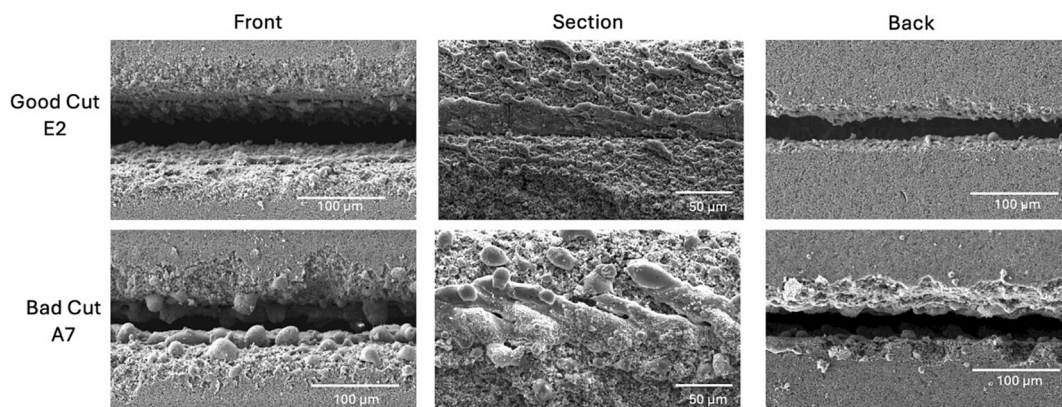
Front, section and back SEM images of cathode cut samples, following exposure at 950 W- 5.50 m/s (good cut) and 190 W-0.31 m/s (bad cut).
